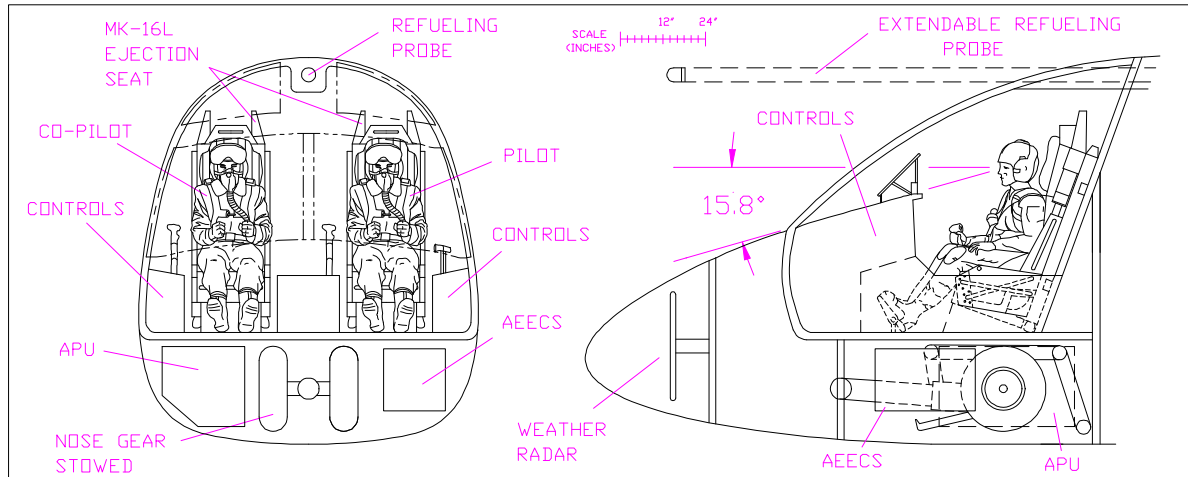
Ejection Seat Installation and Cockpit Layout
